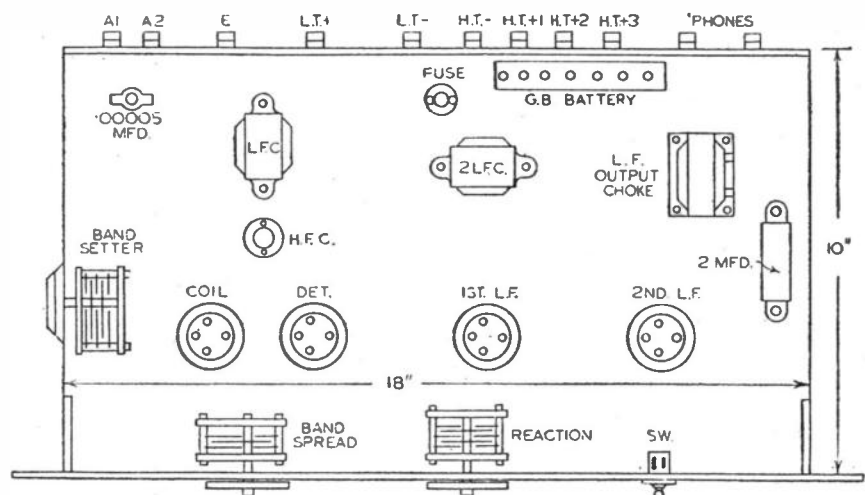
Layout of components for the three-valve S.W. receiver.
